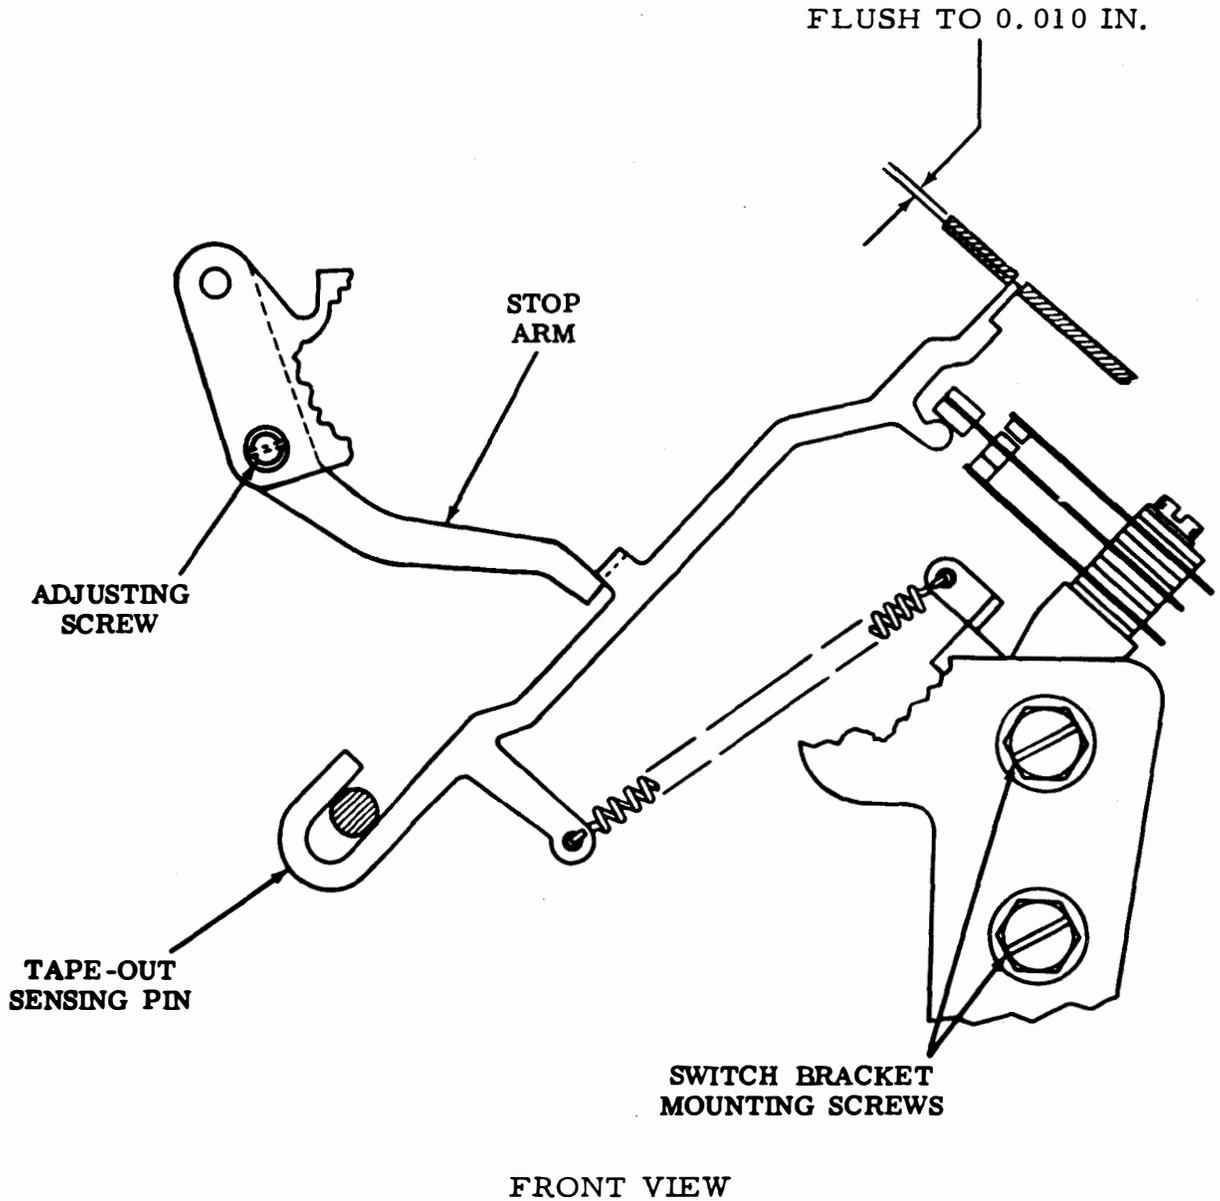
Tape-Out Sensing Pin (For Units Equipped With Tape Lid Sensing Lever)
